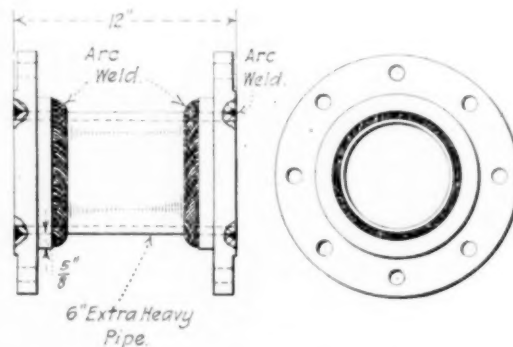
WELDING REQUIRED ON 6-IN. STEEL FLANGE
